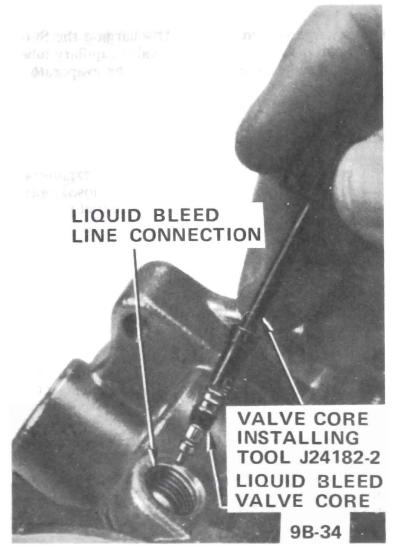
B-38 Installing or Removing Liquid Bleed Valve Core with Tool J-24182-2
